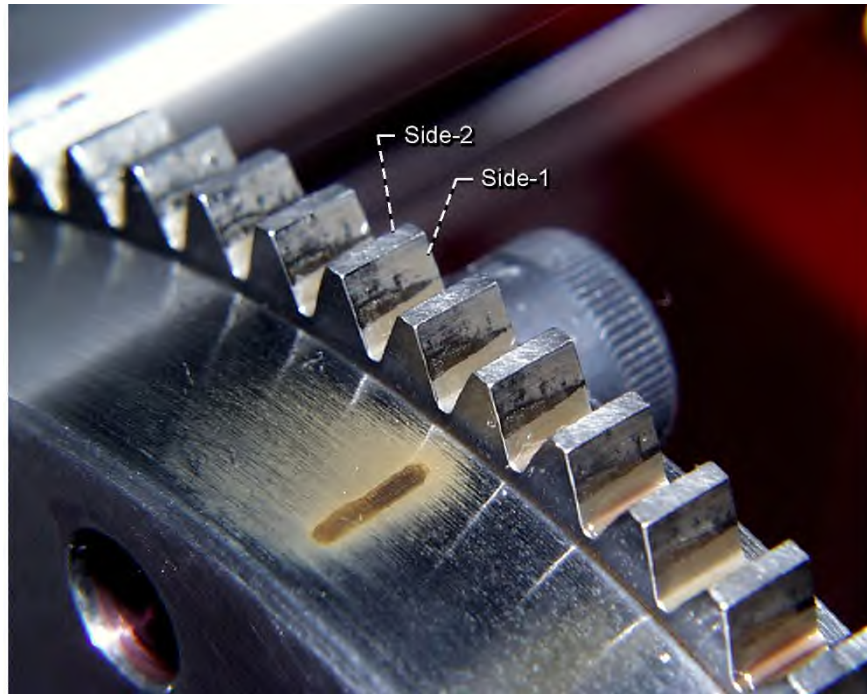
Driving side of ring gear teeth after the Final-5 are still in good condition.
